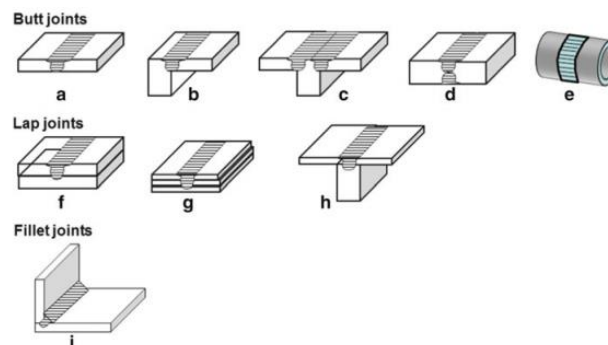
Joint configurations for friction stir welding: (a) single side square butt, (b) edge butt, (c) T butt joint, (d) double side square butt used for thick plates, (e) tubular welds with single side butt joint, (f) lap joint, (g) multiple lap joint, (h) T lap joint, and (i) fillet joint
